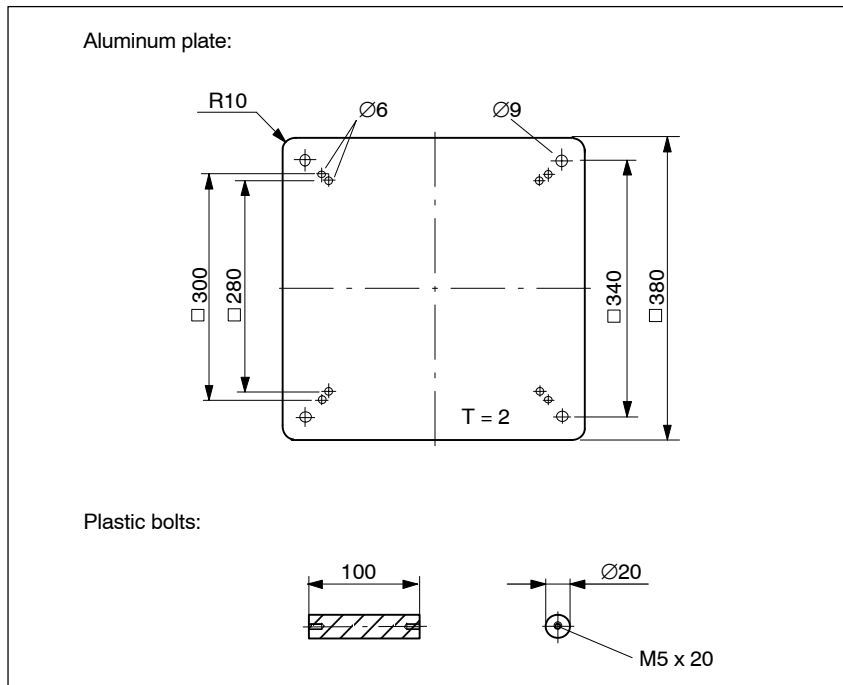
Dimensional drawing of the spacer kit for MOBY F ANT F5
